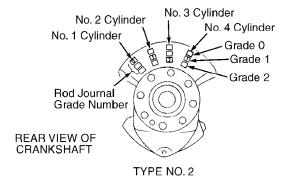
Identifying Rod Journal Grade Number Courtesy of Nissan Motor Co., U.S.A.
